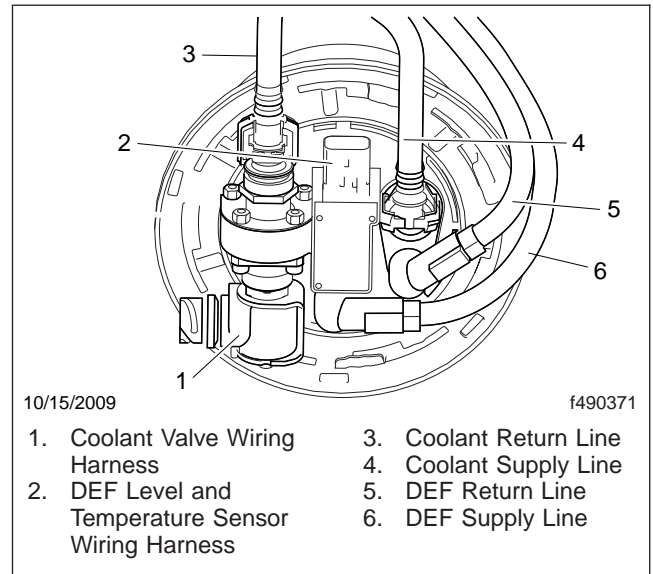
, DEF Tank Header Unit (Detroit Diesel shown)
